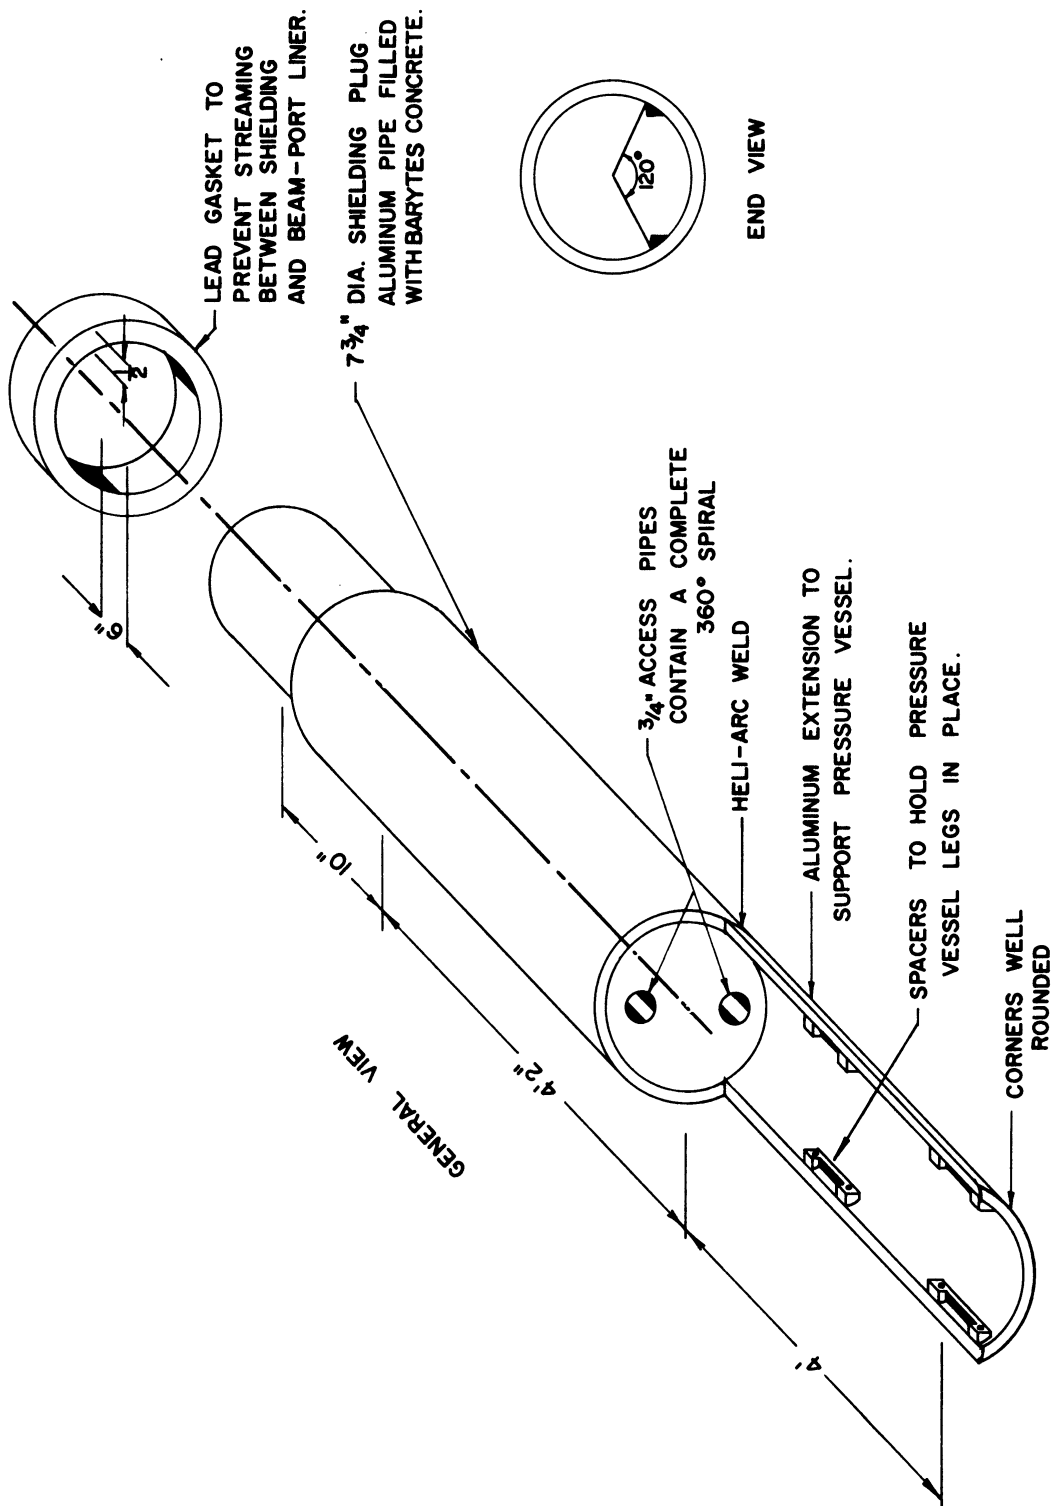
Sketch Showing the Shielding Plug and Reaction Vessel Support
